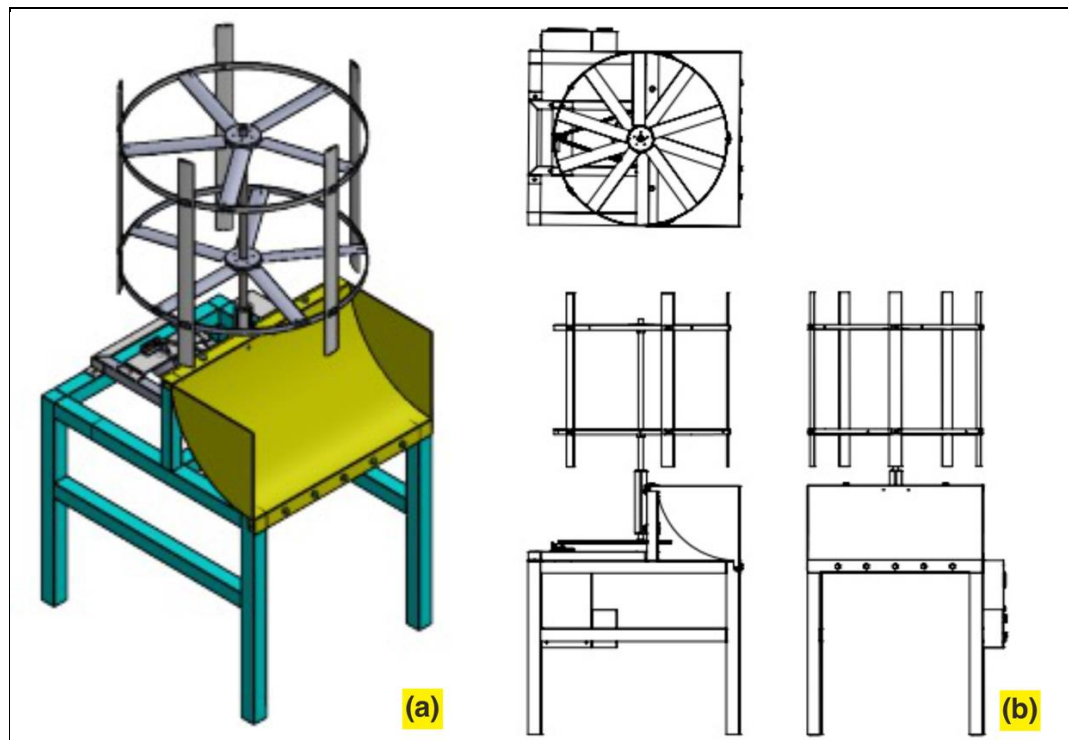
Cross axis wind turbine model design drawing consisting of: (a) assembly drawing and (b) view drawing
